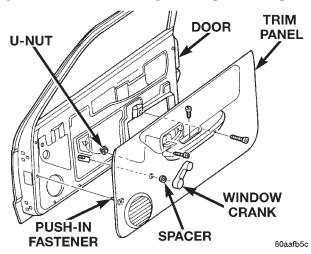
Front Door Trim Panel Remove/Install - Manual Window
